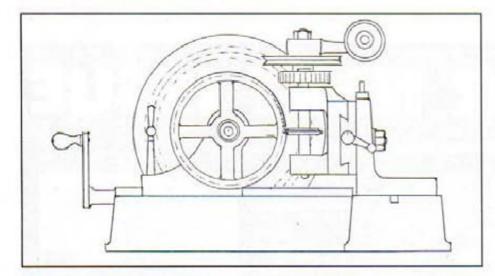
Sketch of Joseph Whitworth's gear cutting machine, 1844.
